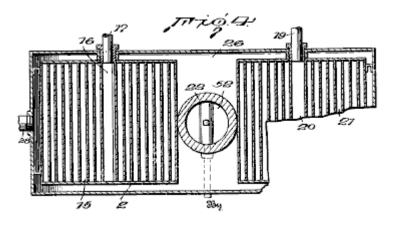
is a detail sectional view on line 5--5 of Fig.3
